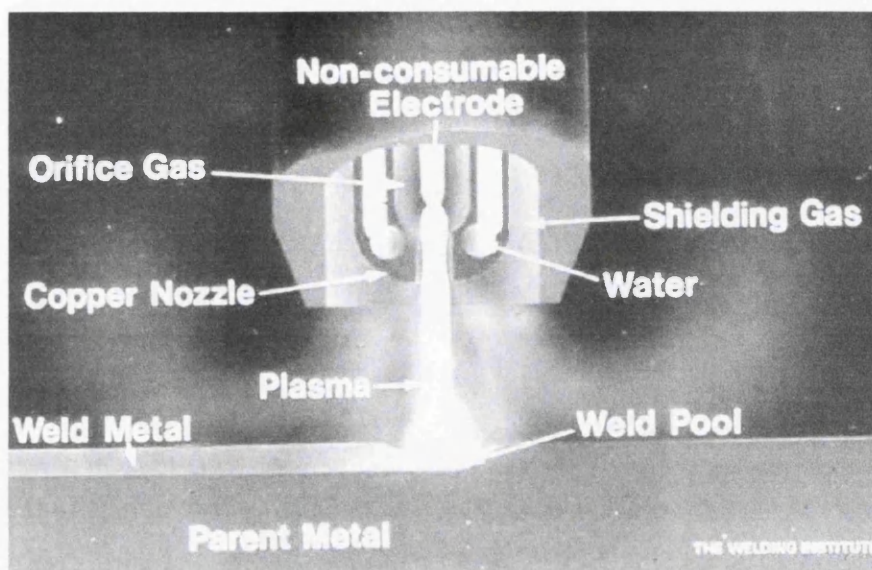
A schematic diagram of the plasma arc welding process.
